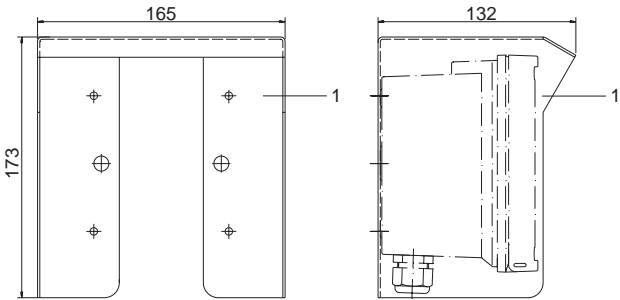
ZU 0276 protective hood for wall and pipe mounting
